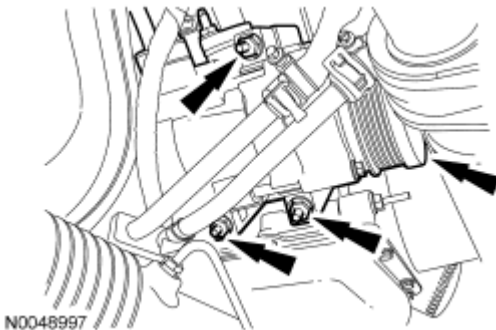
Identifying A/C Compressor, Bolt & Nuts
